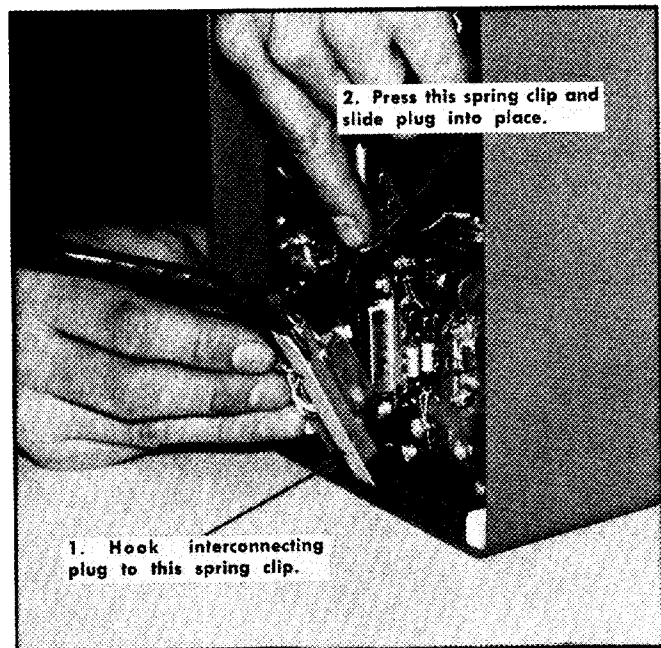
Securing the power cable to the power supply for remote operation.
